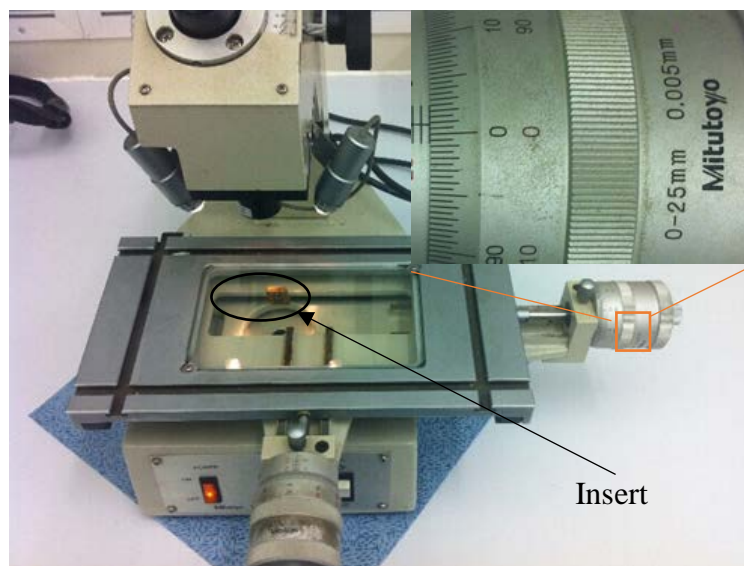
Toolmaker microscope, used in this study to measure the tool flank wear
